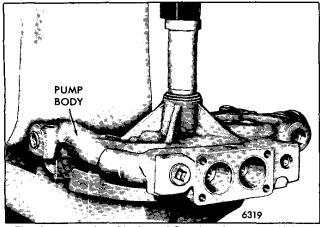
Removing Shaft and Bearing Assembly Using Tool J 29189-A
